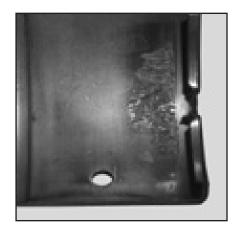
GSC spalling on the outer race was the result of a needle bearing installed in an inaccurately machined housing.
